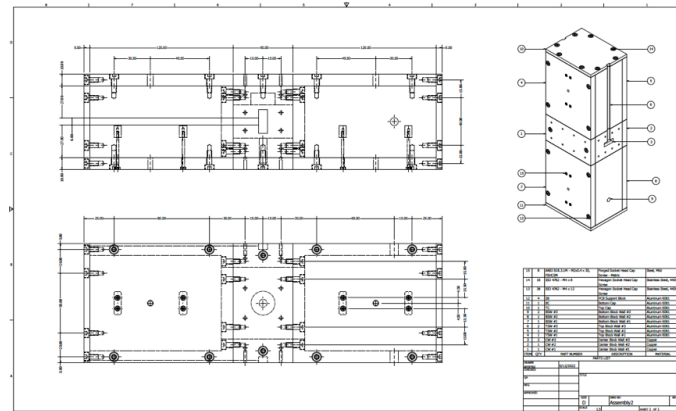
The test jig designed in Rome, it will be built thanks to local co-funding at Sapienza Univ.
